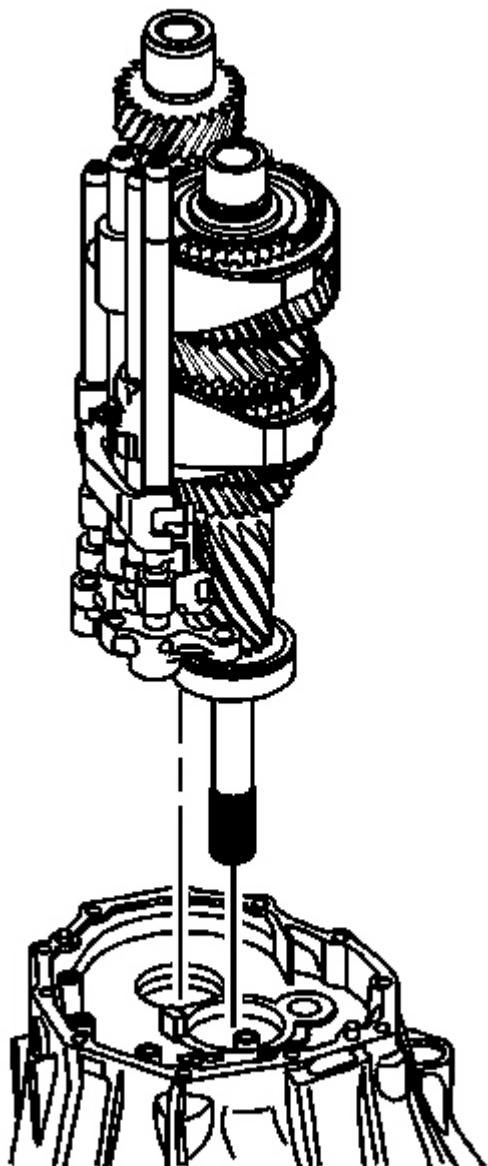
View Of Input Shaft, Countershaft & Shift Rail Assembly
